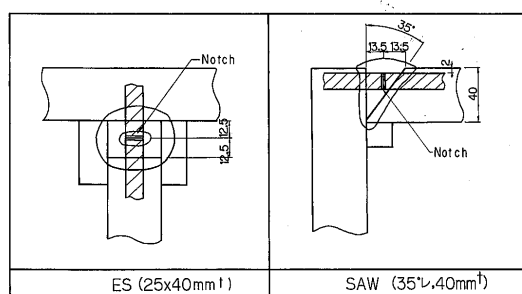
Notch location of impact test samples extracted from weld metal
